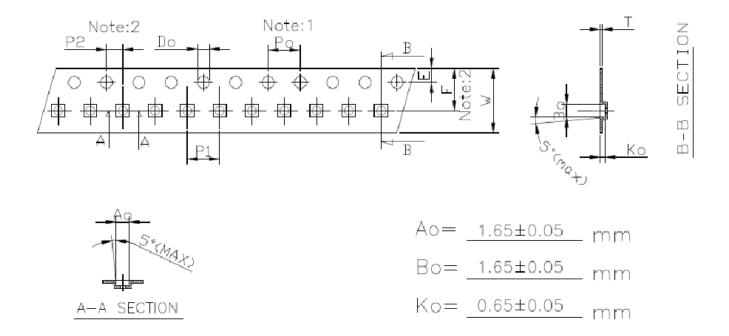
Tape and Pocket Drawing for LGA-4 Package
